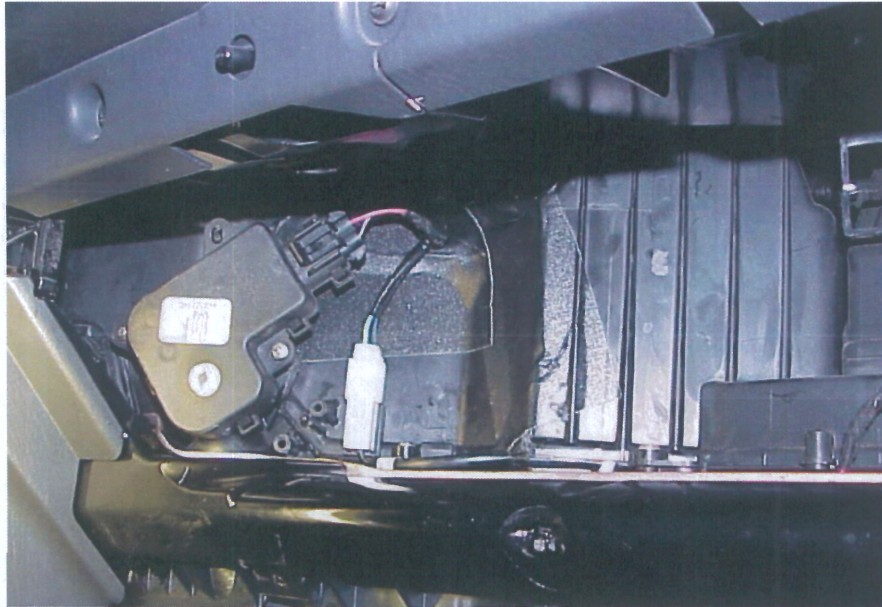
Sealing Tape Located Over Access Panel Edges)
